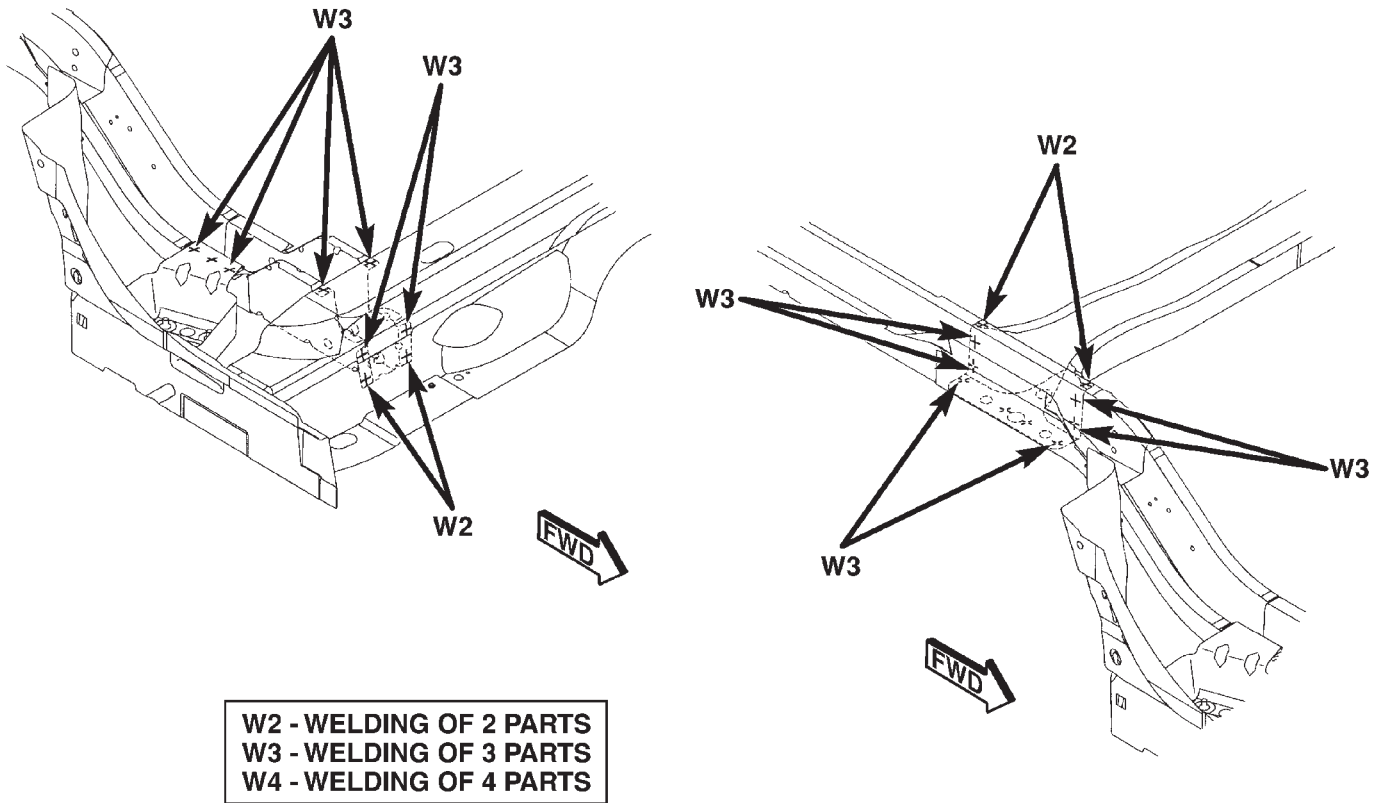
CENTER FLOOR PAN CROSSMEMBER TO REAR FLOOR PAN SIDE RAIL REAR EXTENSION TO CENTER FLOOR SIDE RAIL
